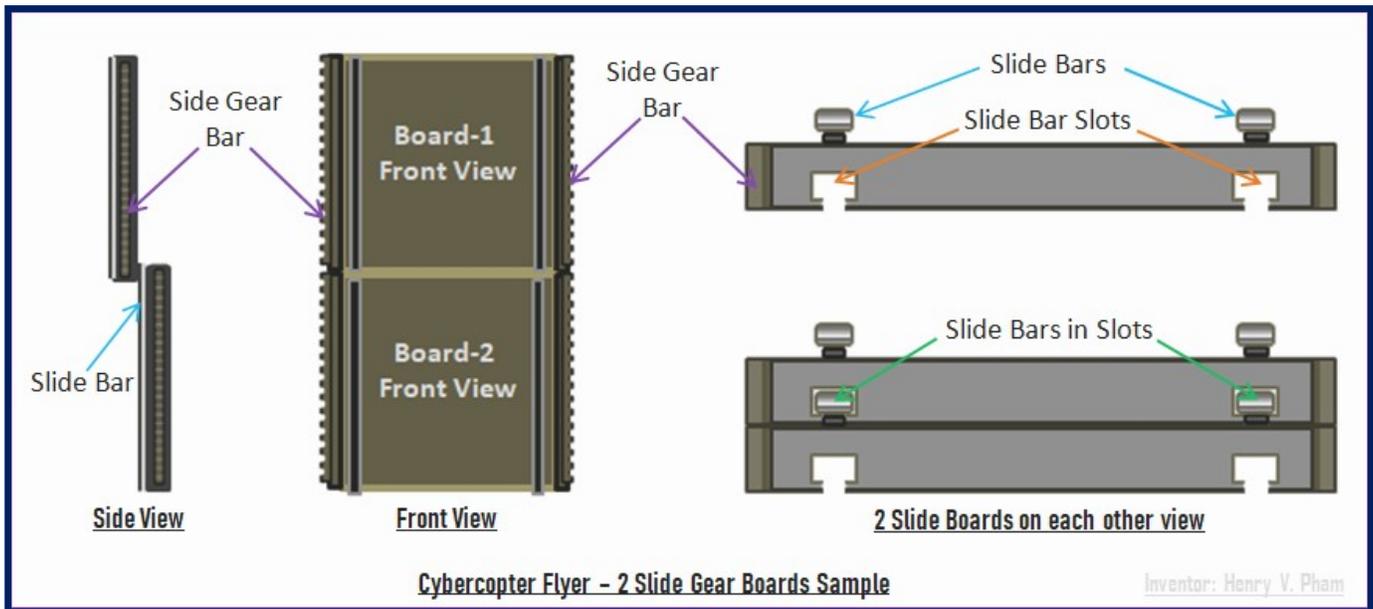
One Step Self-Foldable Elevator 2 Slide Gear Boards Sample
